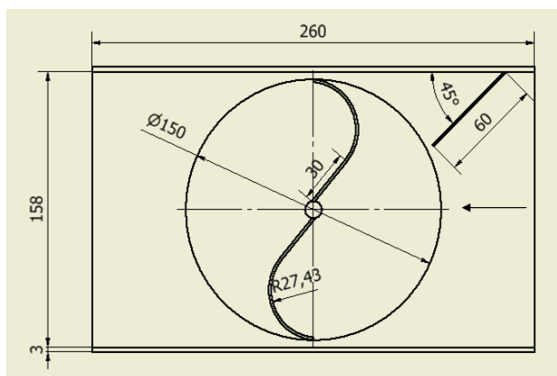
Turbine rotor equipped with a guide with an angle of 45.
